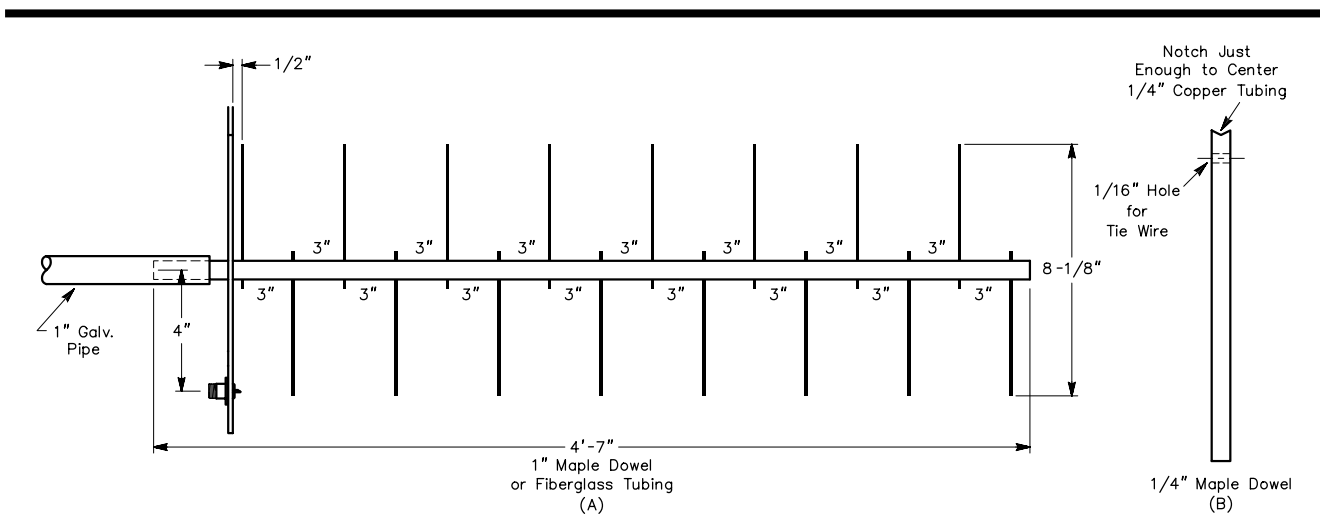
At A, the layout of the portable 435-MHz helix is shown. Spacing between the first 5-inch winding-support dowel and the ground plane is 1/2 inch; all other dowels are spaced 3 inches apart. At B, the detail of notching the winding-support dowels to accept the tubing is shown. As indicated, drill a 1/16-inch hole below the notch for a piece of small wire to hold the tubing in place.
